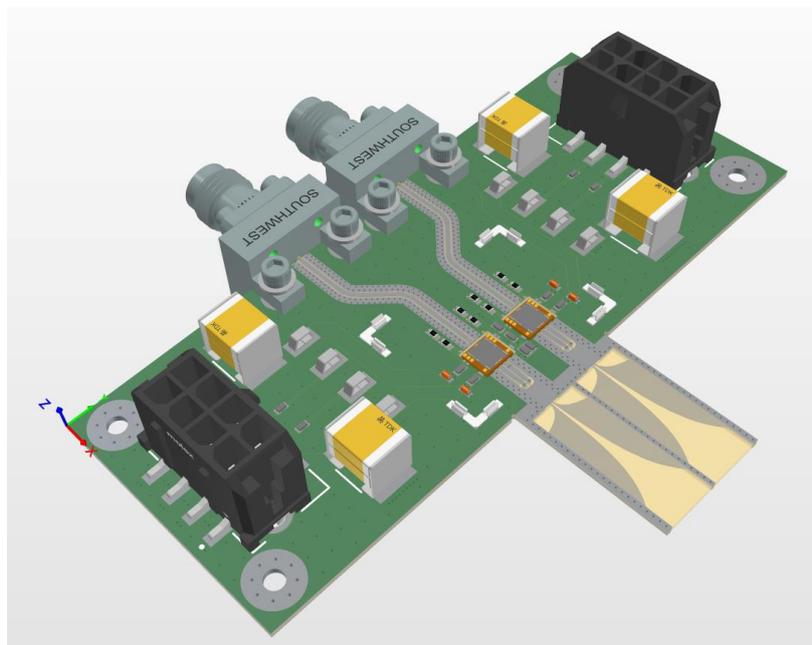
DRIFT Demonstrator PCB with Vivaldi.
